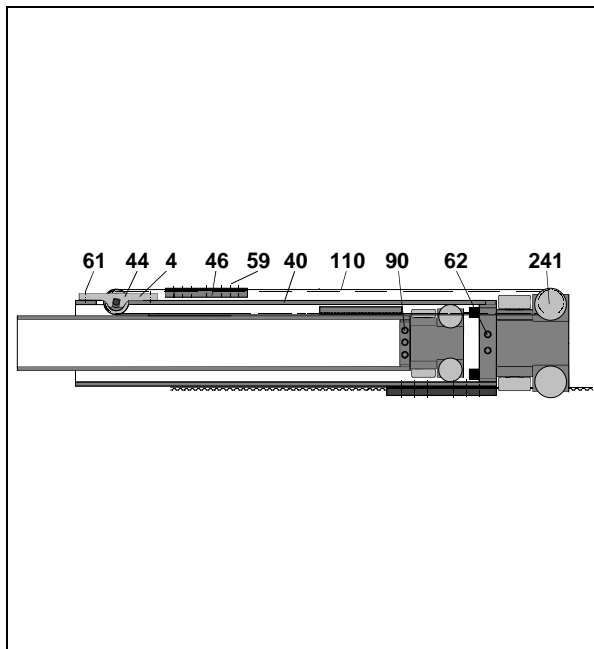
Adjust the rollers of the rotor station upper inner section
